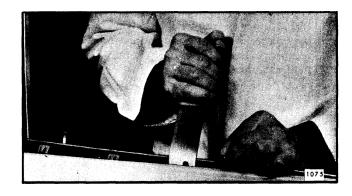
Clip Retained Belt Sealing Strip Assembly Removal
